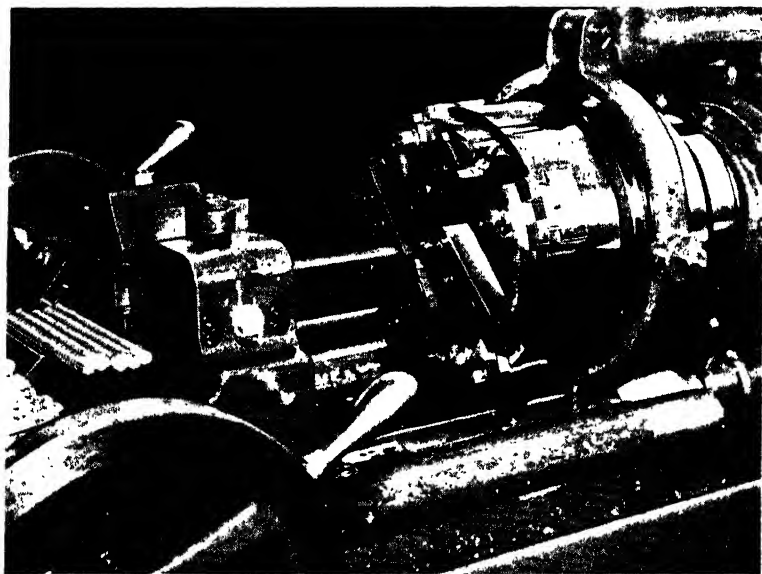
Cutting Threads to a Class 3 Fit on a Threading Machine
